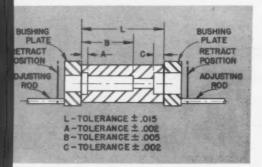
A typical example of a part with a dimensional float on the overall length.
